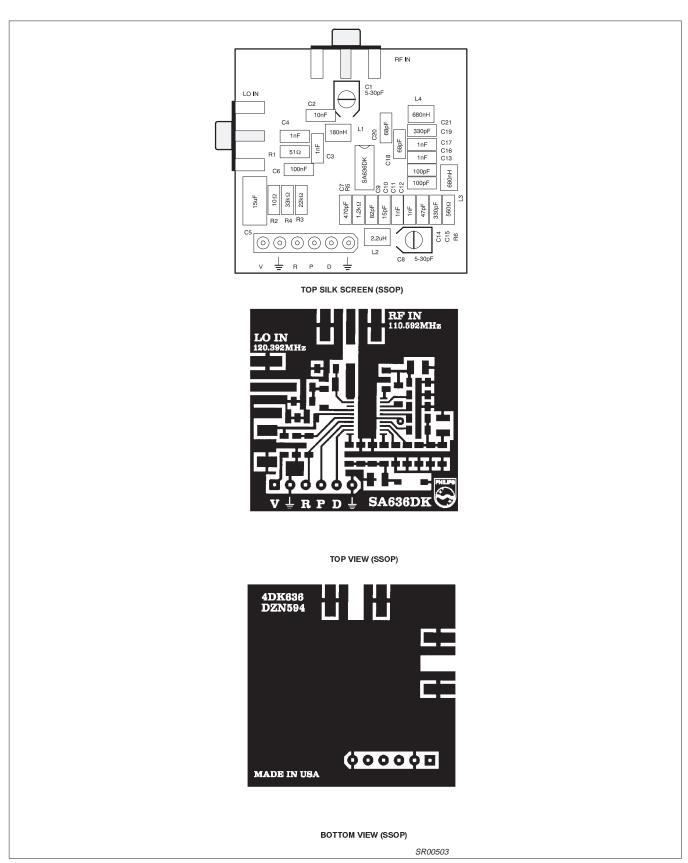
SA636 Demoboard Layout (Not Actual Size)
